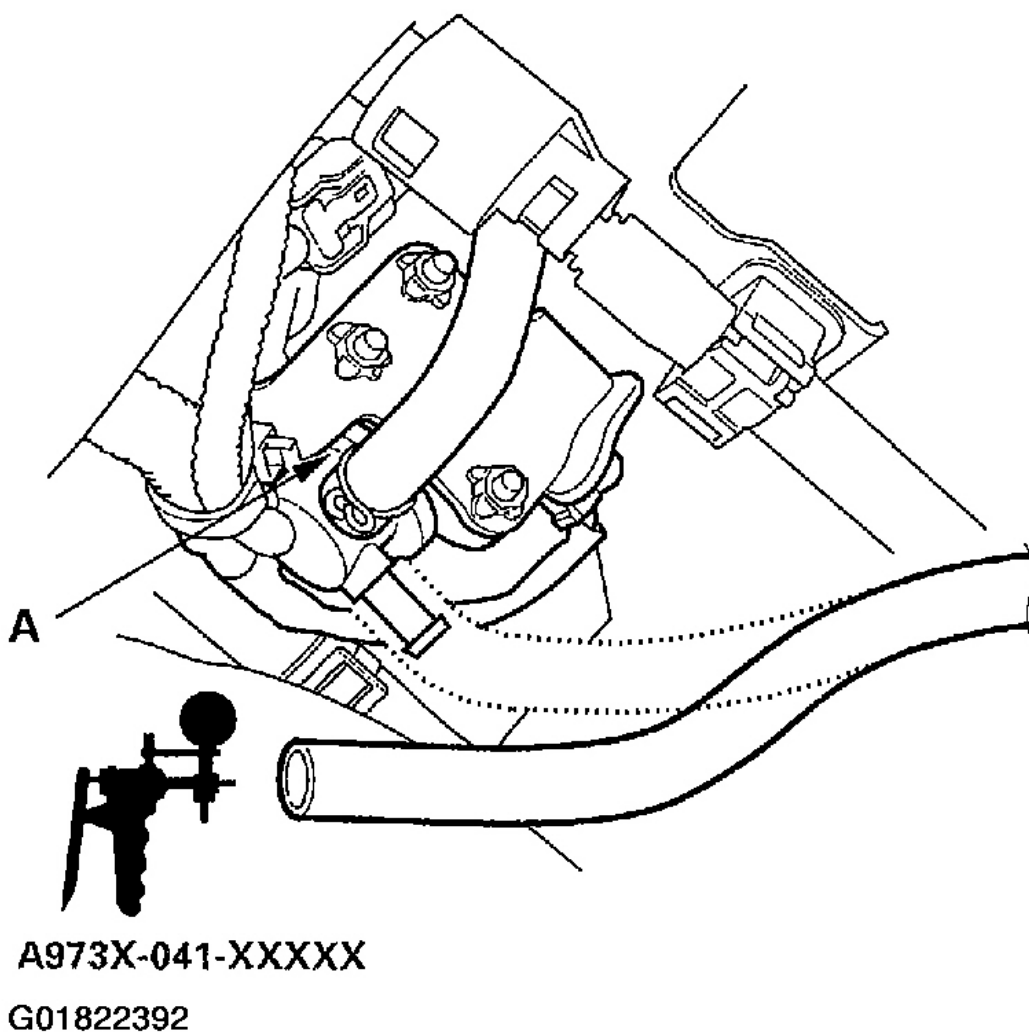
Disconnecting The Vacuum Hose (Purge Line) From The EVAP Canister Purge Valve
